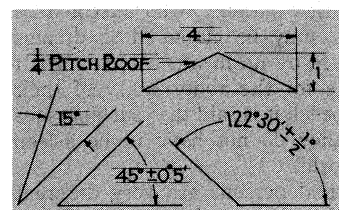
METHODS OF DIMENSIONING ANGLES
